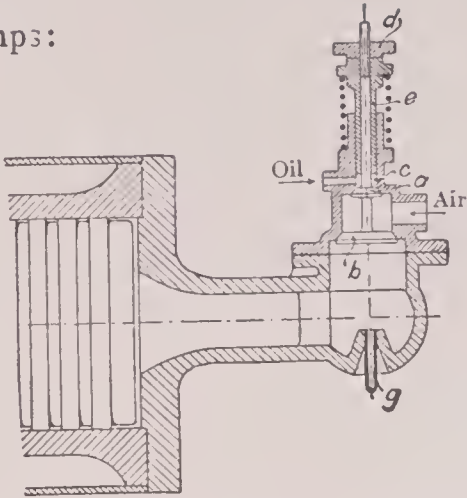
Vaporizer, Henriad Schweizer (Lüde Type).
